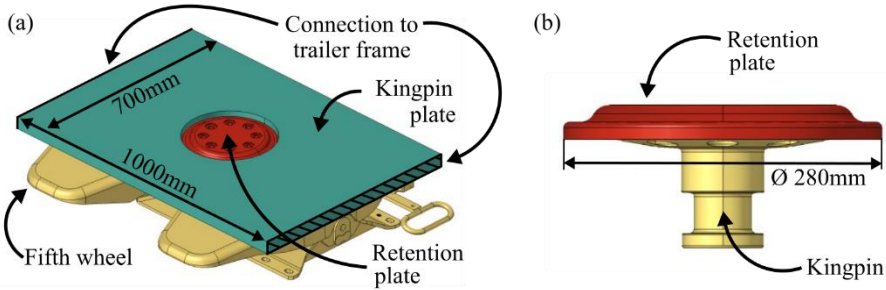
Fifth wheel coupling (a) assembly of all components (b) assembly of kingpin and retention plate
